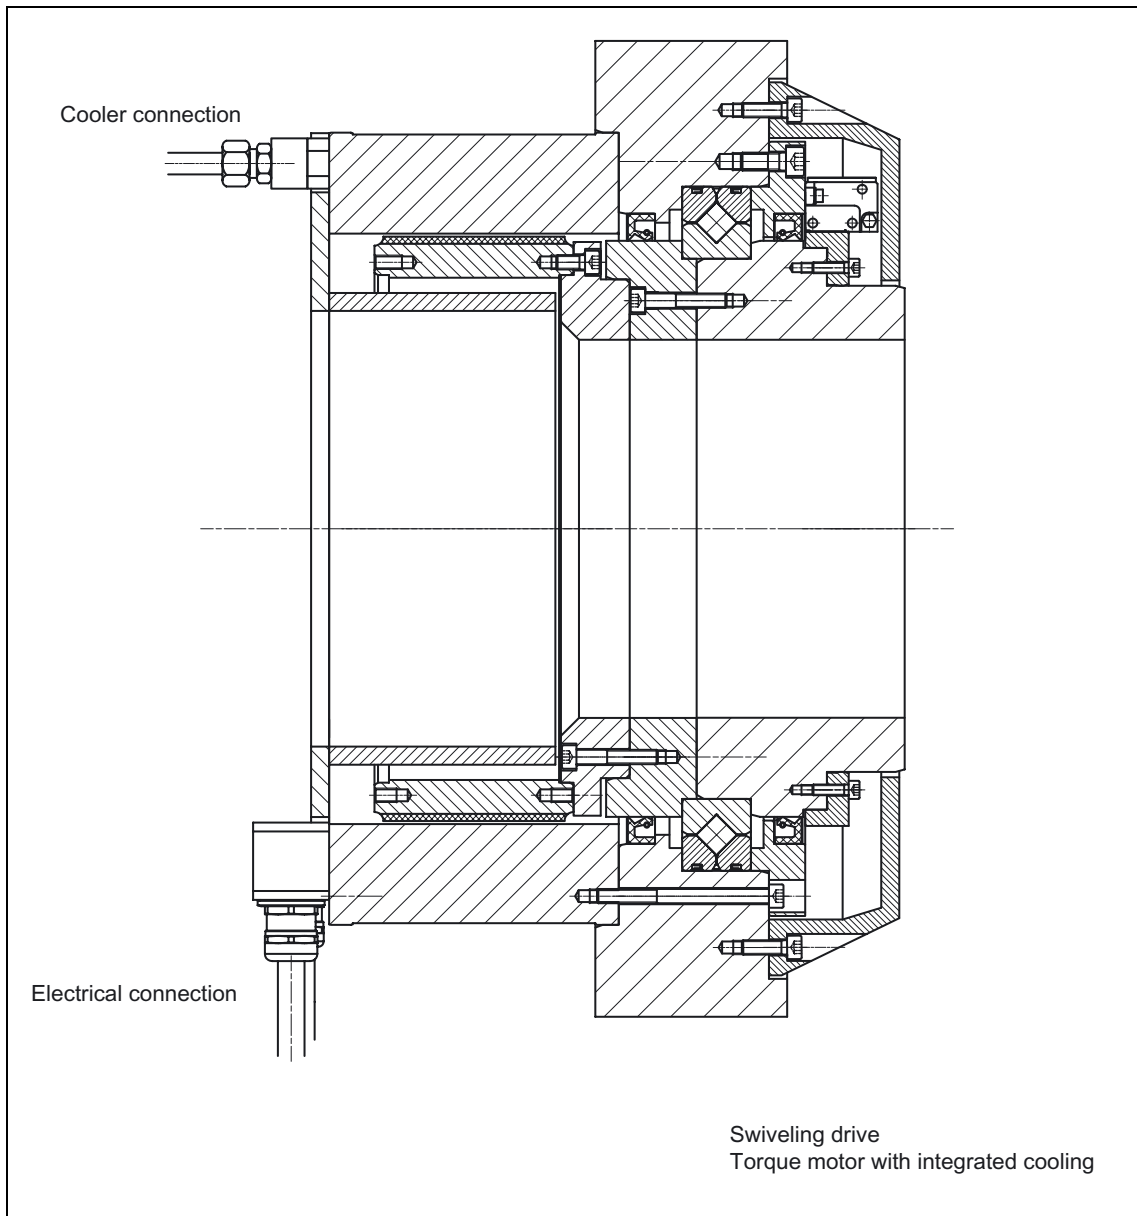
Swiveling drive using a torque motor with integrated cooling
